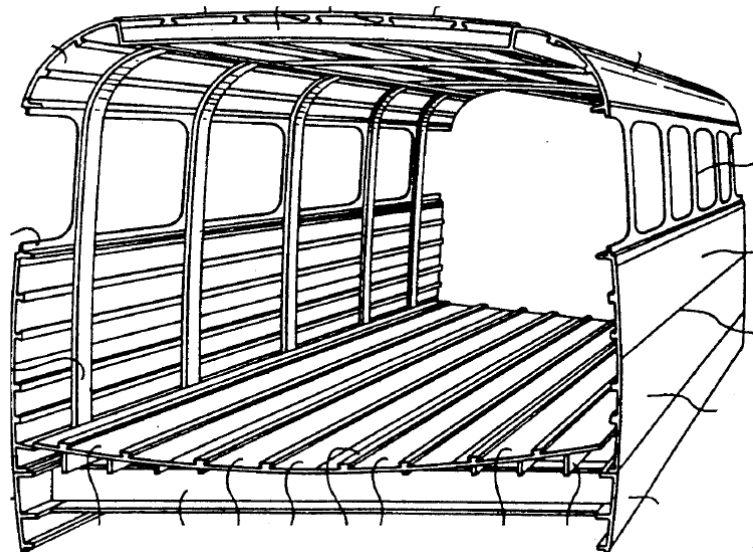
Typical aluminum extrusion element used for side wall construction [1]
